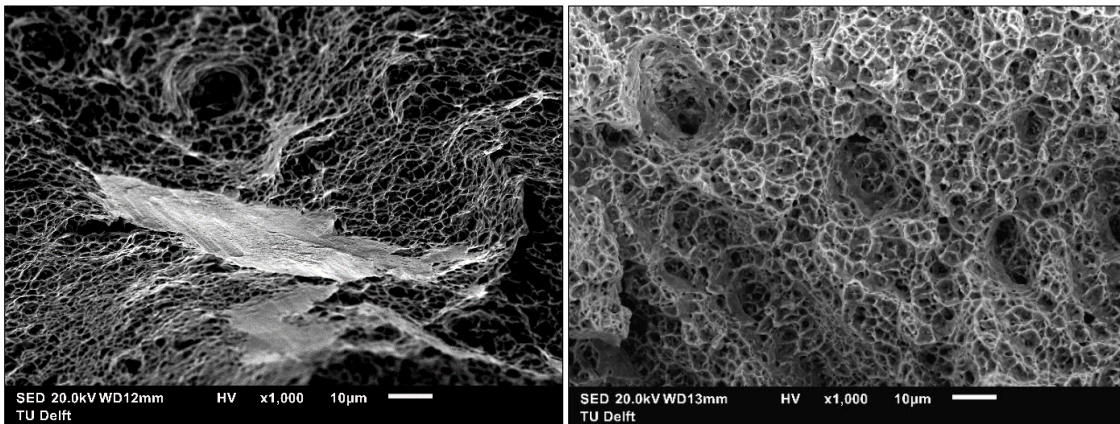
Fracture surfaces of the horizontal tensile specimen 3, of the block produced at RAMLAB, observed with SEM.
